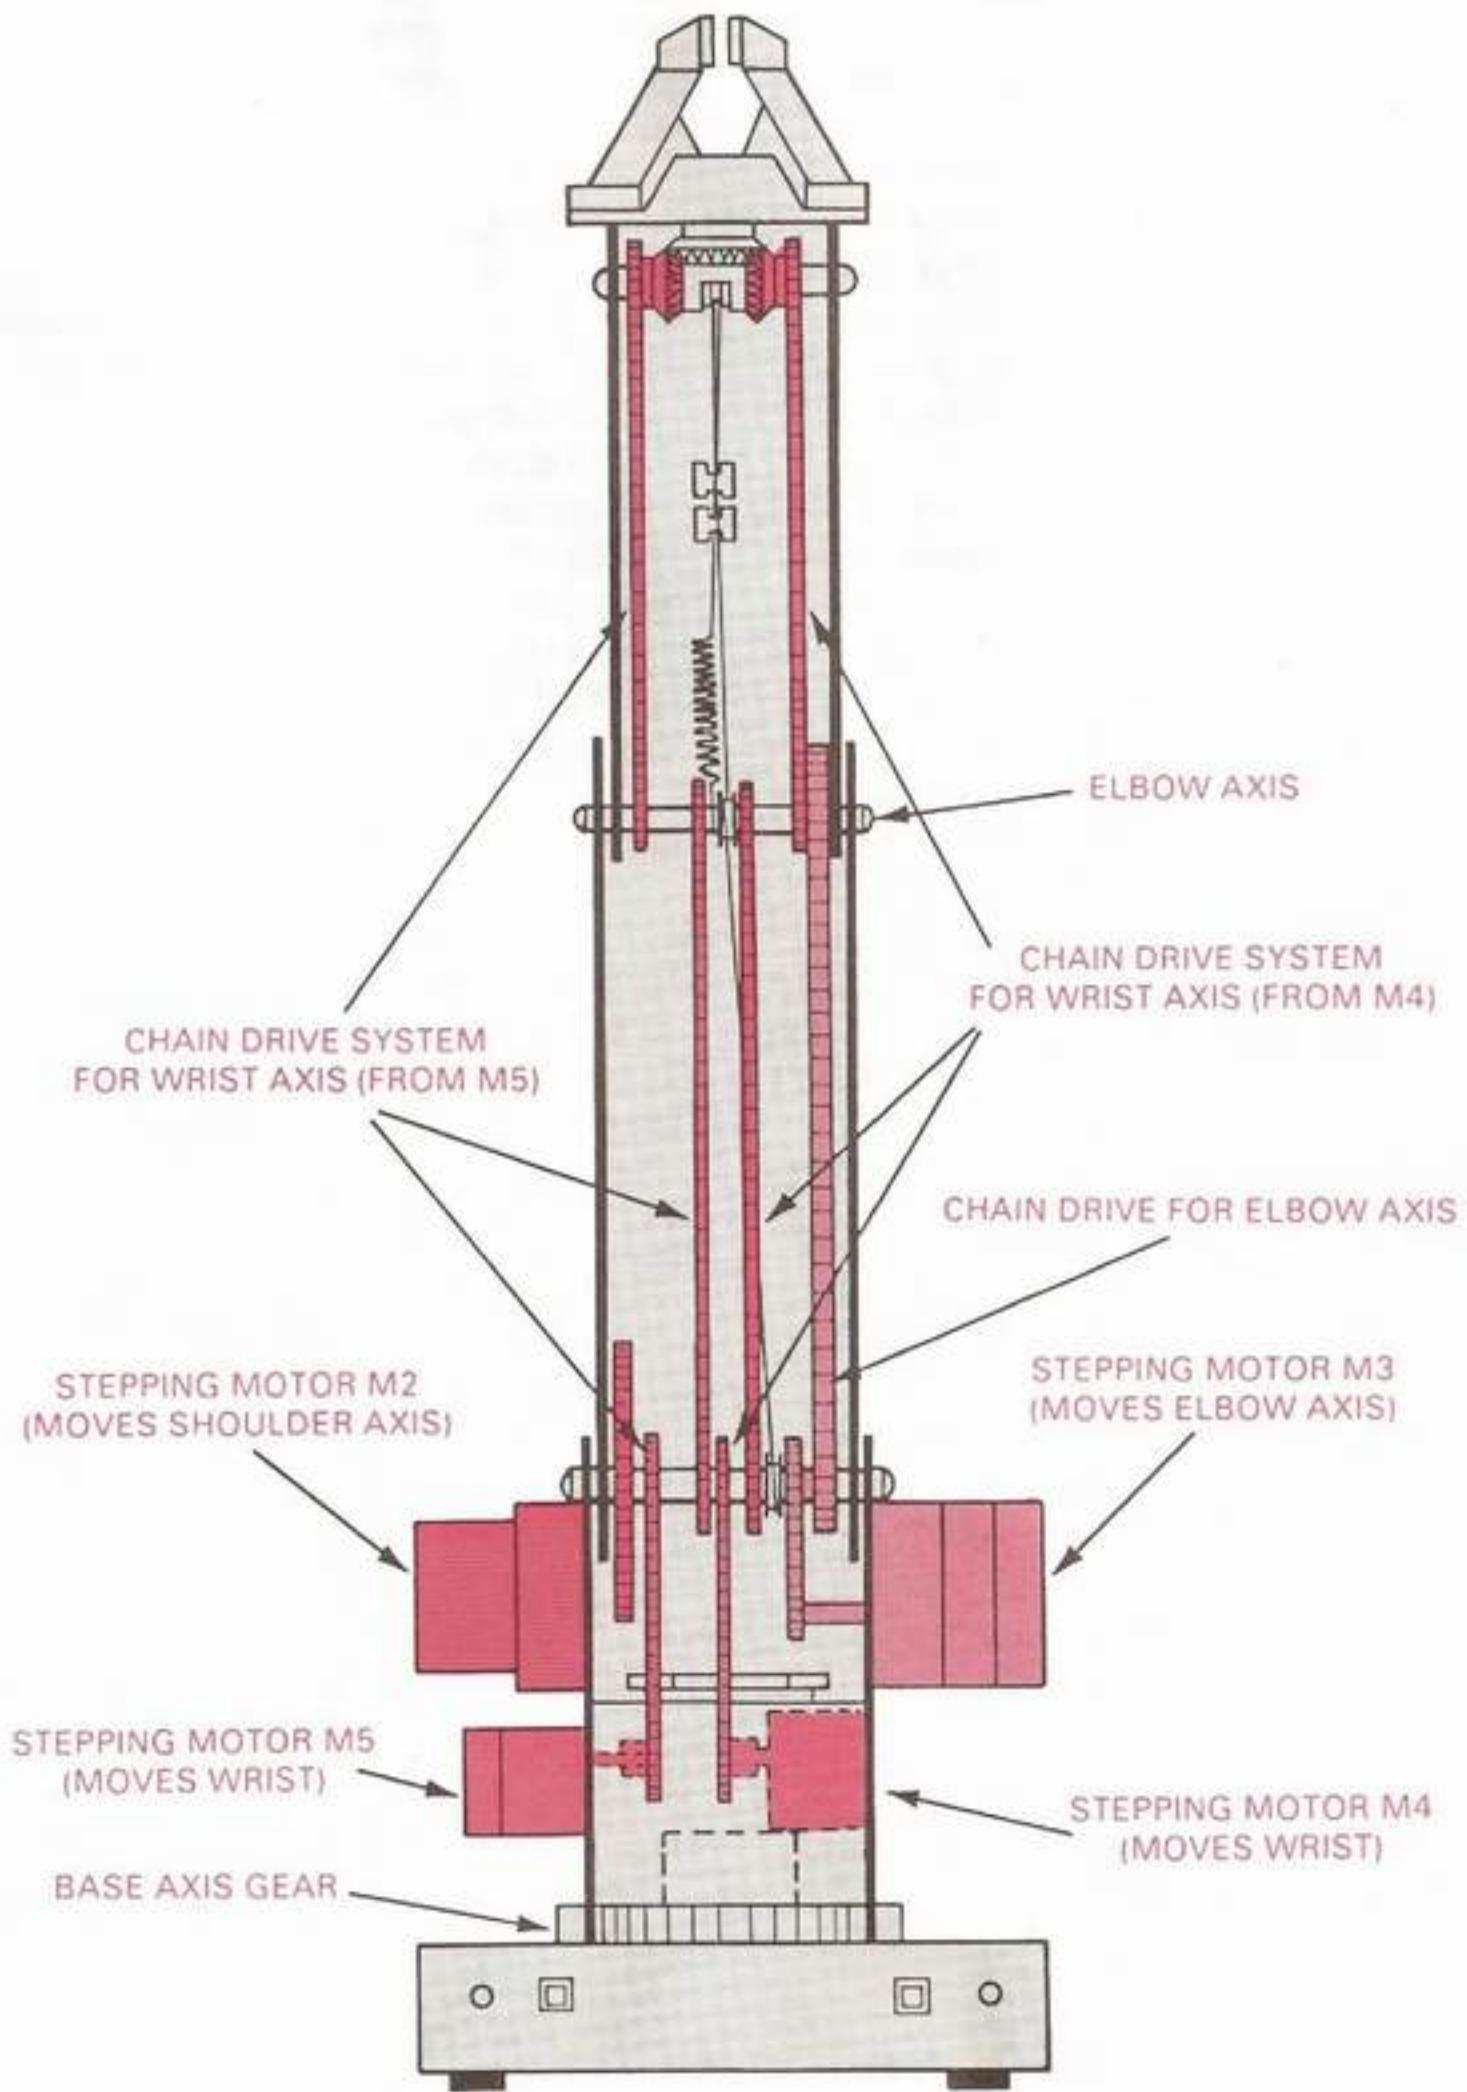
The Pro-Arm's Motors, Gears, and Linkage
